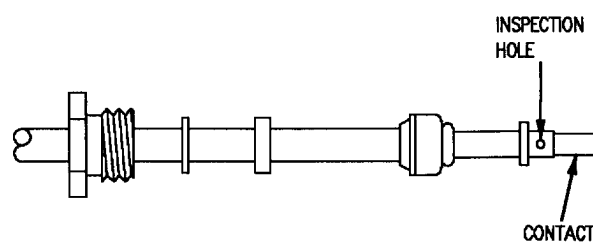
M25516/19-04-14 Coax Connector Repair (Sheet 1)
